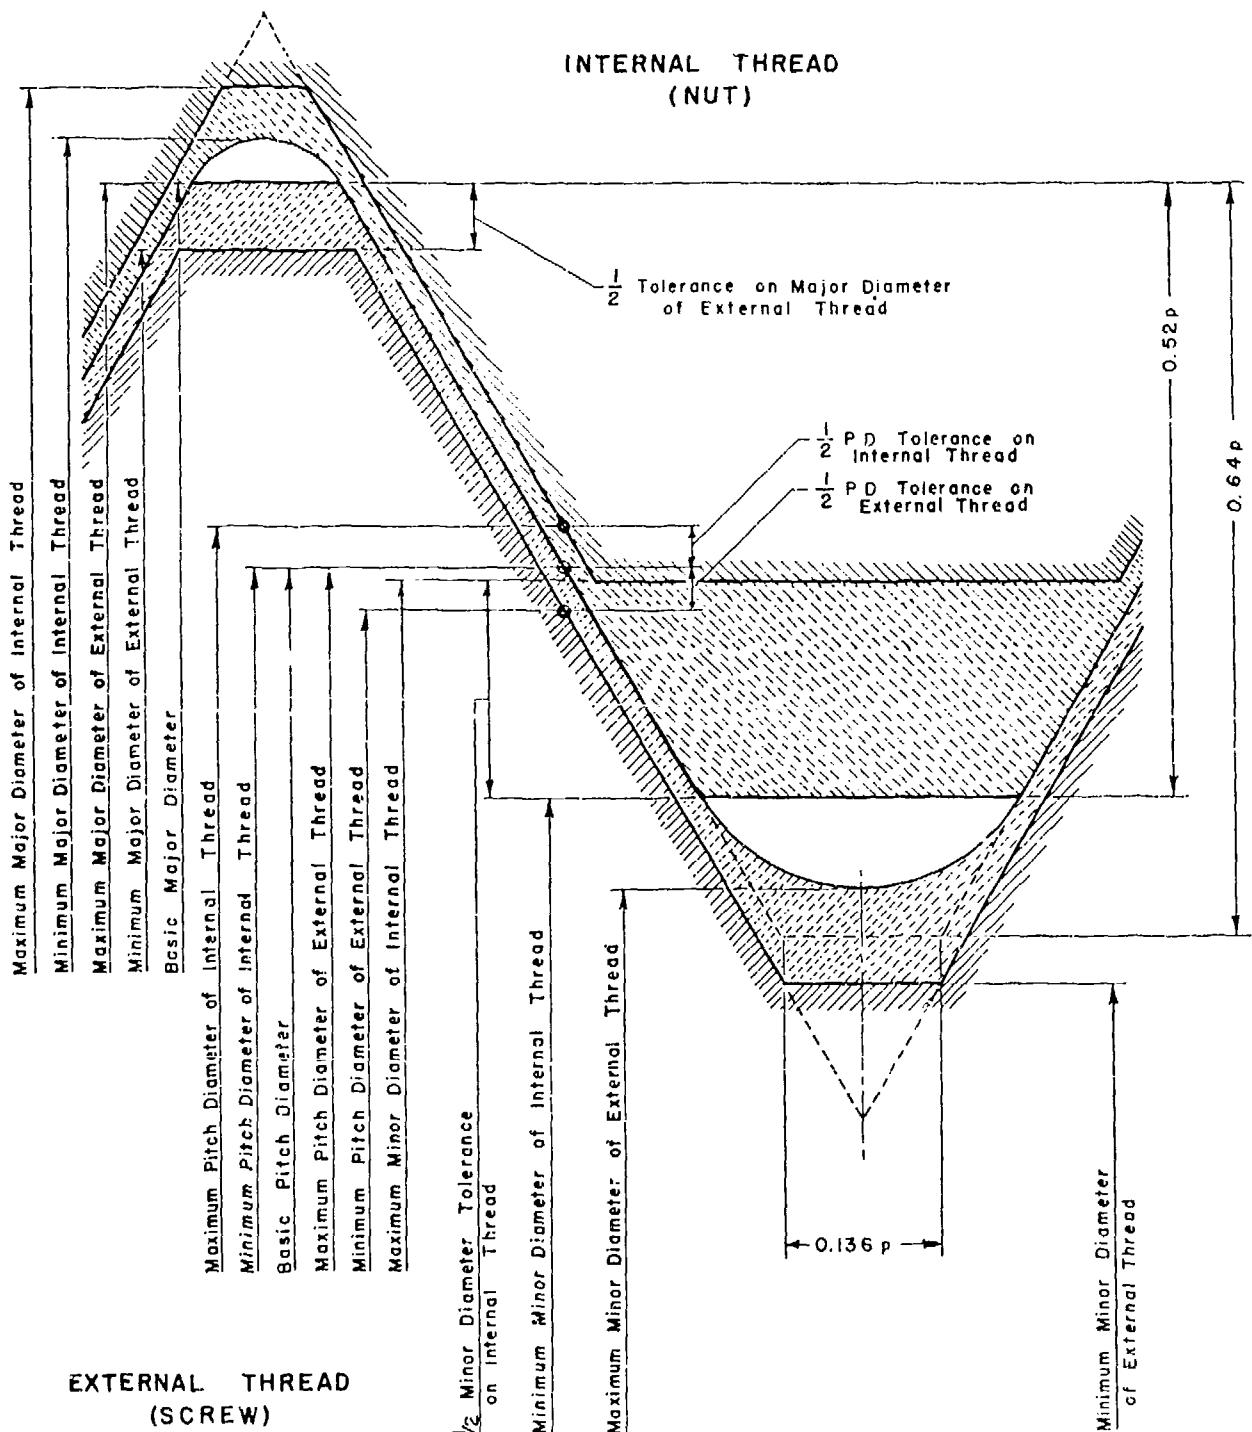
Disposition of tolerances and crest clearances, National Miniature threads.
